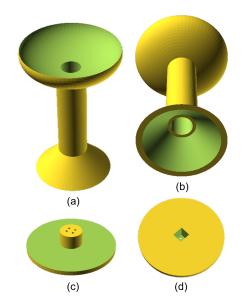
Design of two 3-dimensional printed components to be combined to form the housing of Soniccup, (a) and (b) show different perspectives of the body of a chalice shape object, (c) and (d) show different perspective of an attachment base to the chalice shape object, designed to include a specific double pole double throw switch in the prototype model.
